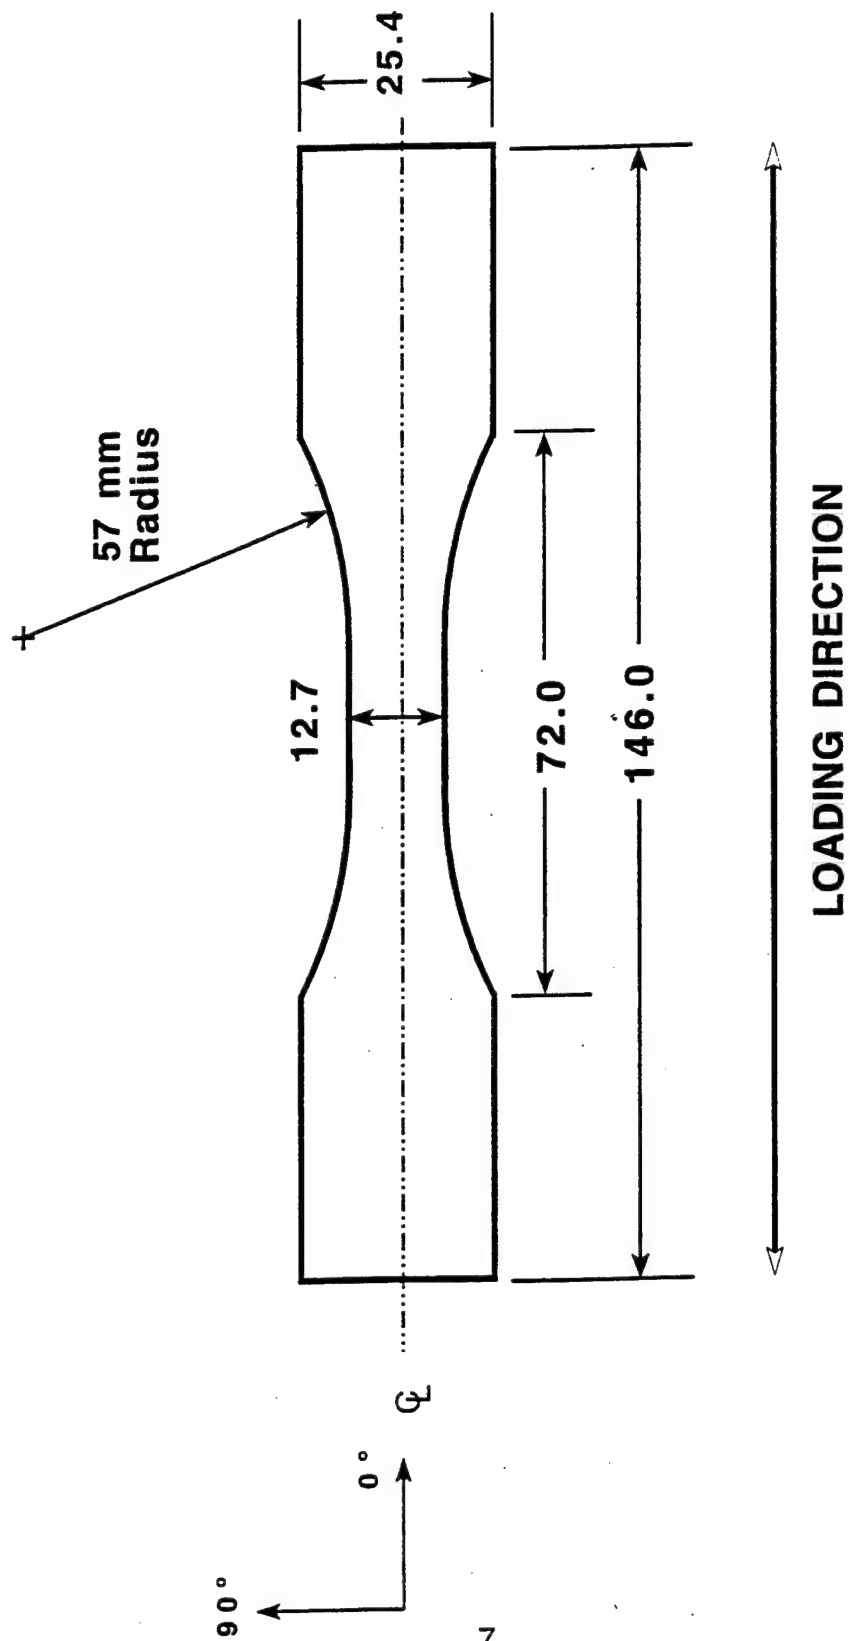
High frequency fatigue specimen geometry (dimensions in mm)
